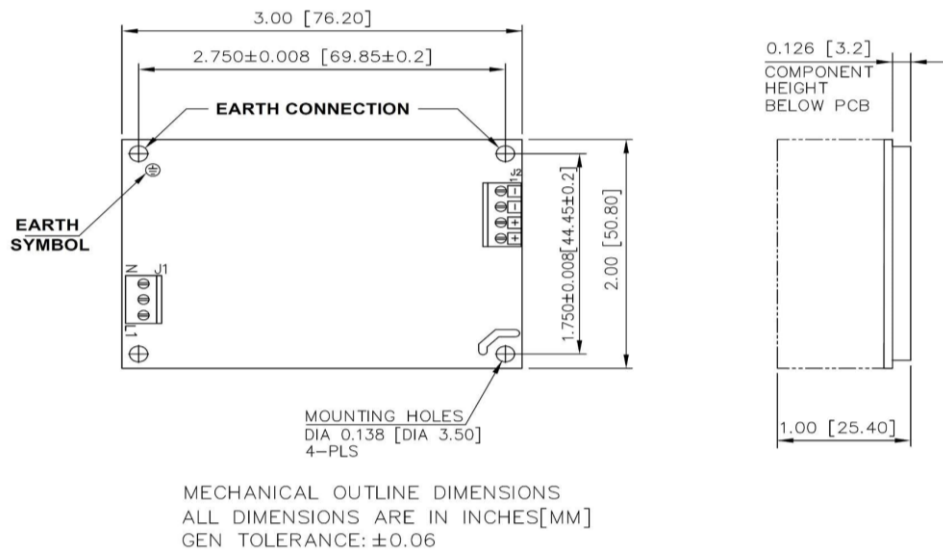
Mechanical Drawing - Screw Terminal (Option 1)
